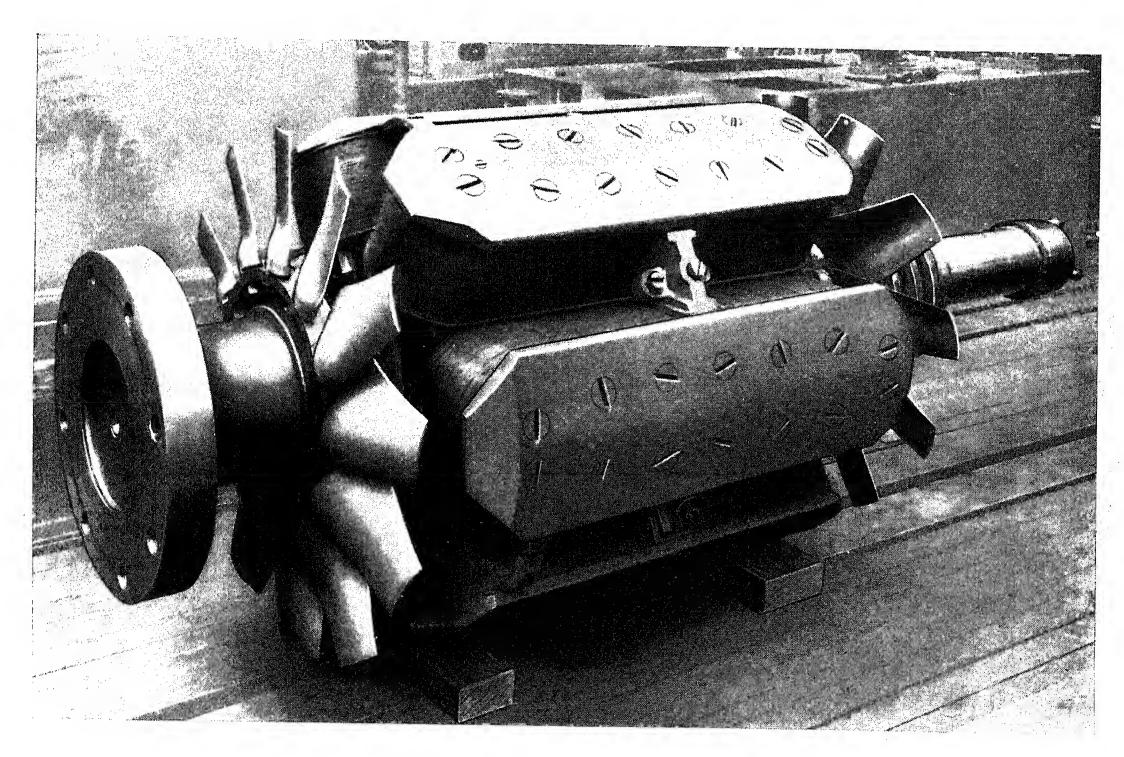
Arrangement of aerofoil-type fans on a 3125-kVA, 3400-volt, 3-phase, 50-cycle, 1000-r.p.m. geared alternator.
